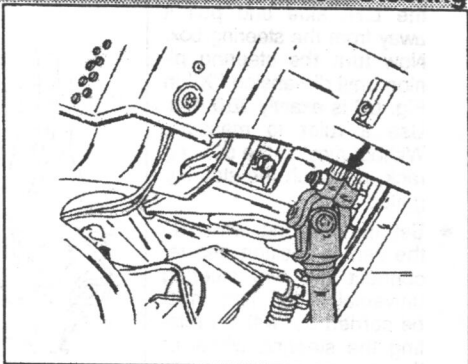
The arrow shows the clamp bolt of the universal joint between the upper and lower steering shaft.
